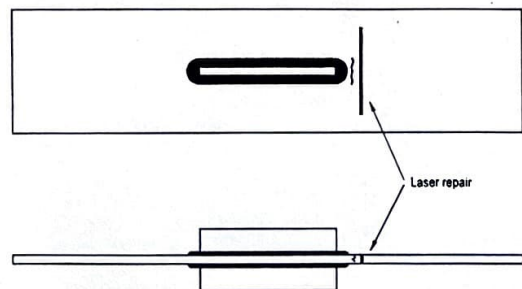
Schematic representation of the site of post-repair fatigue crack initiation for a majority of laser weld repair test specimens.
